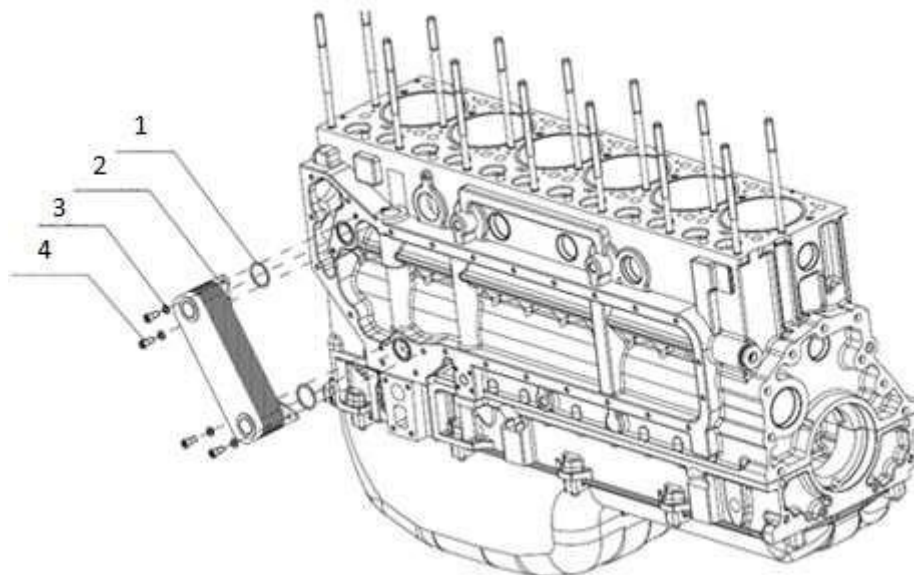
Assembly and Disassembly Drawing for Oil Cooler
